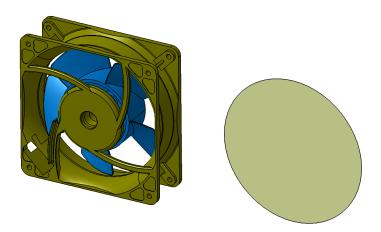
The CAD of the actual radiator fan and the circular surface that replaces it
